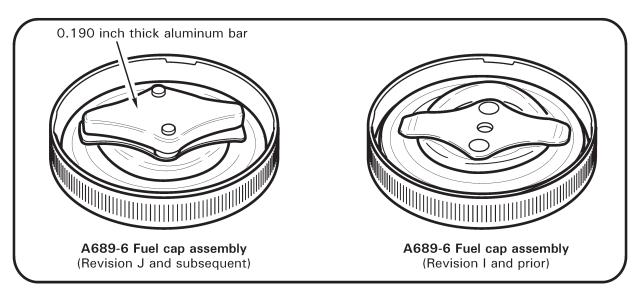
A A689-6 FUEL CAP REVISIONS
